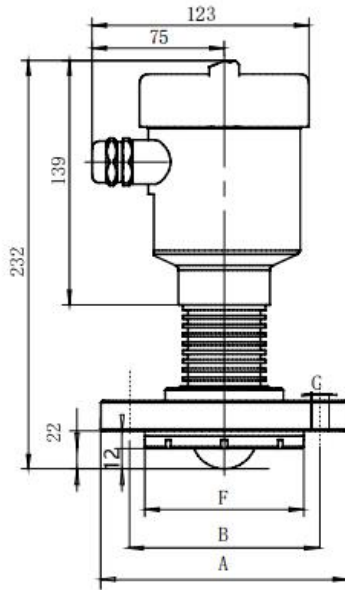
Anti-corrosion flange with 3° beam angle in -40 ~ 200°C
